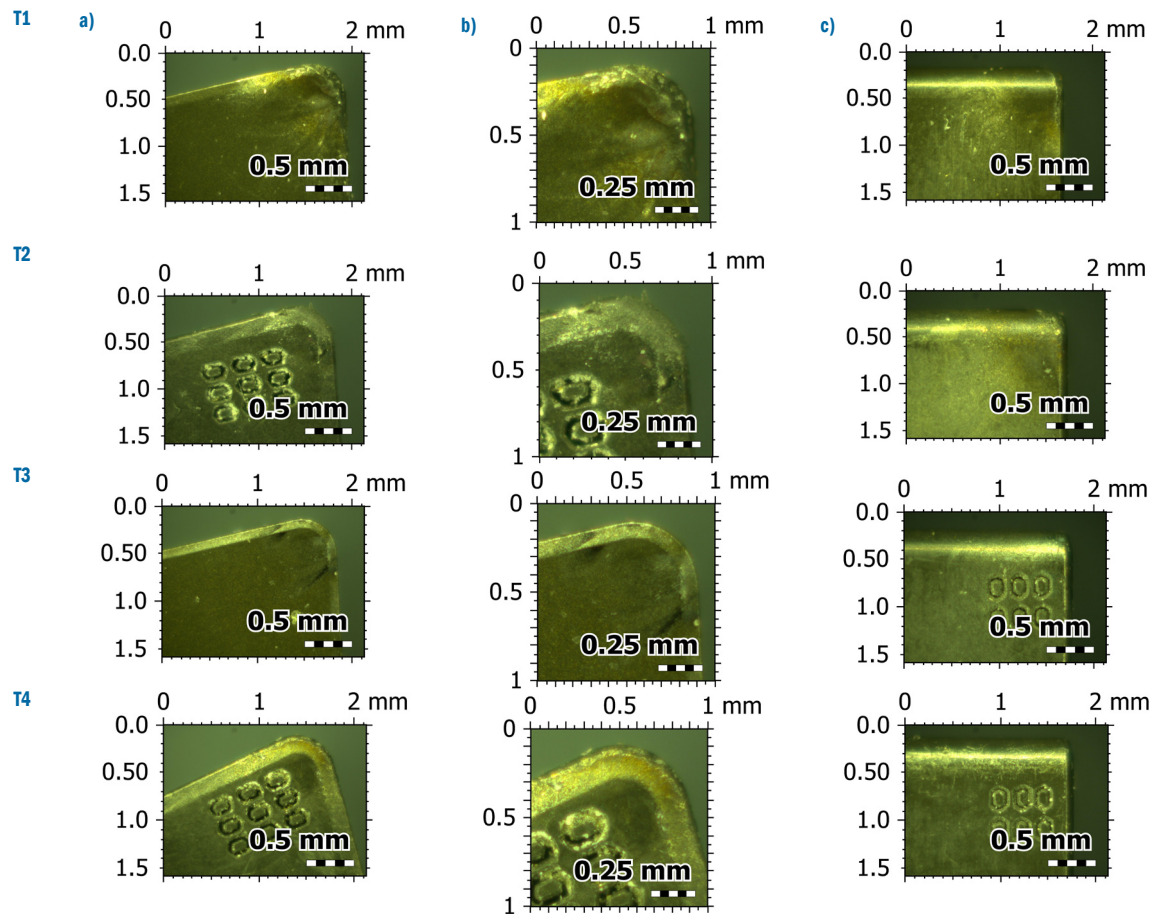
SEM tool wear patterns of four types of cutting tools; a) front surface; b) local magnification; and c) side surface (all units in mm)
